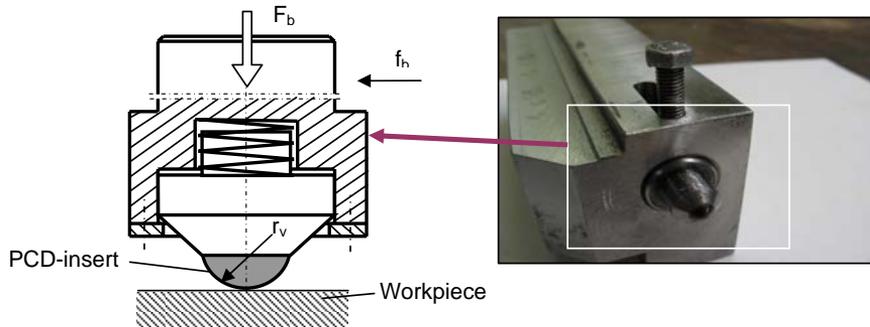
Schematic and photo of burnishing tool with PCD-insert
